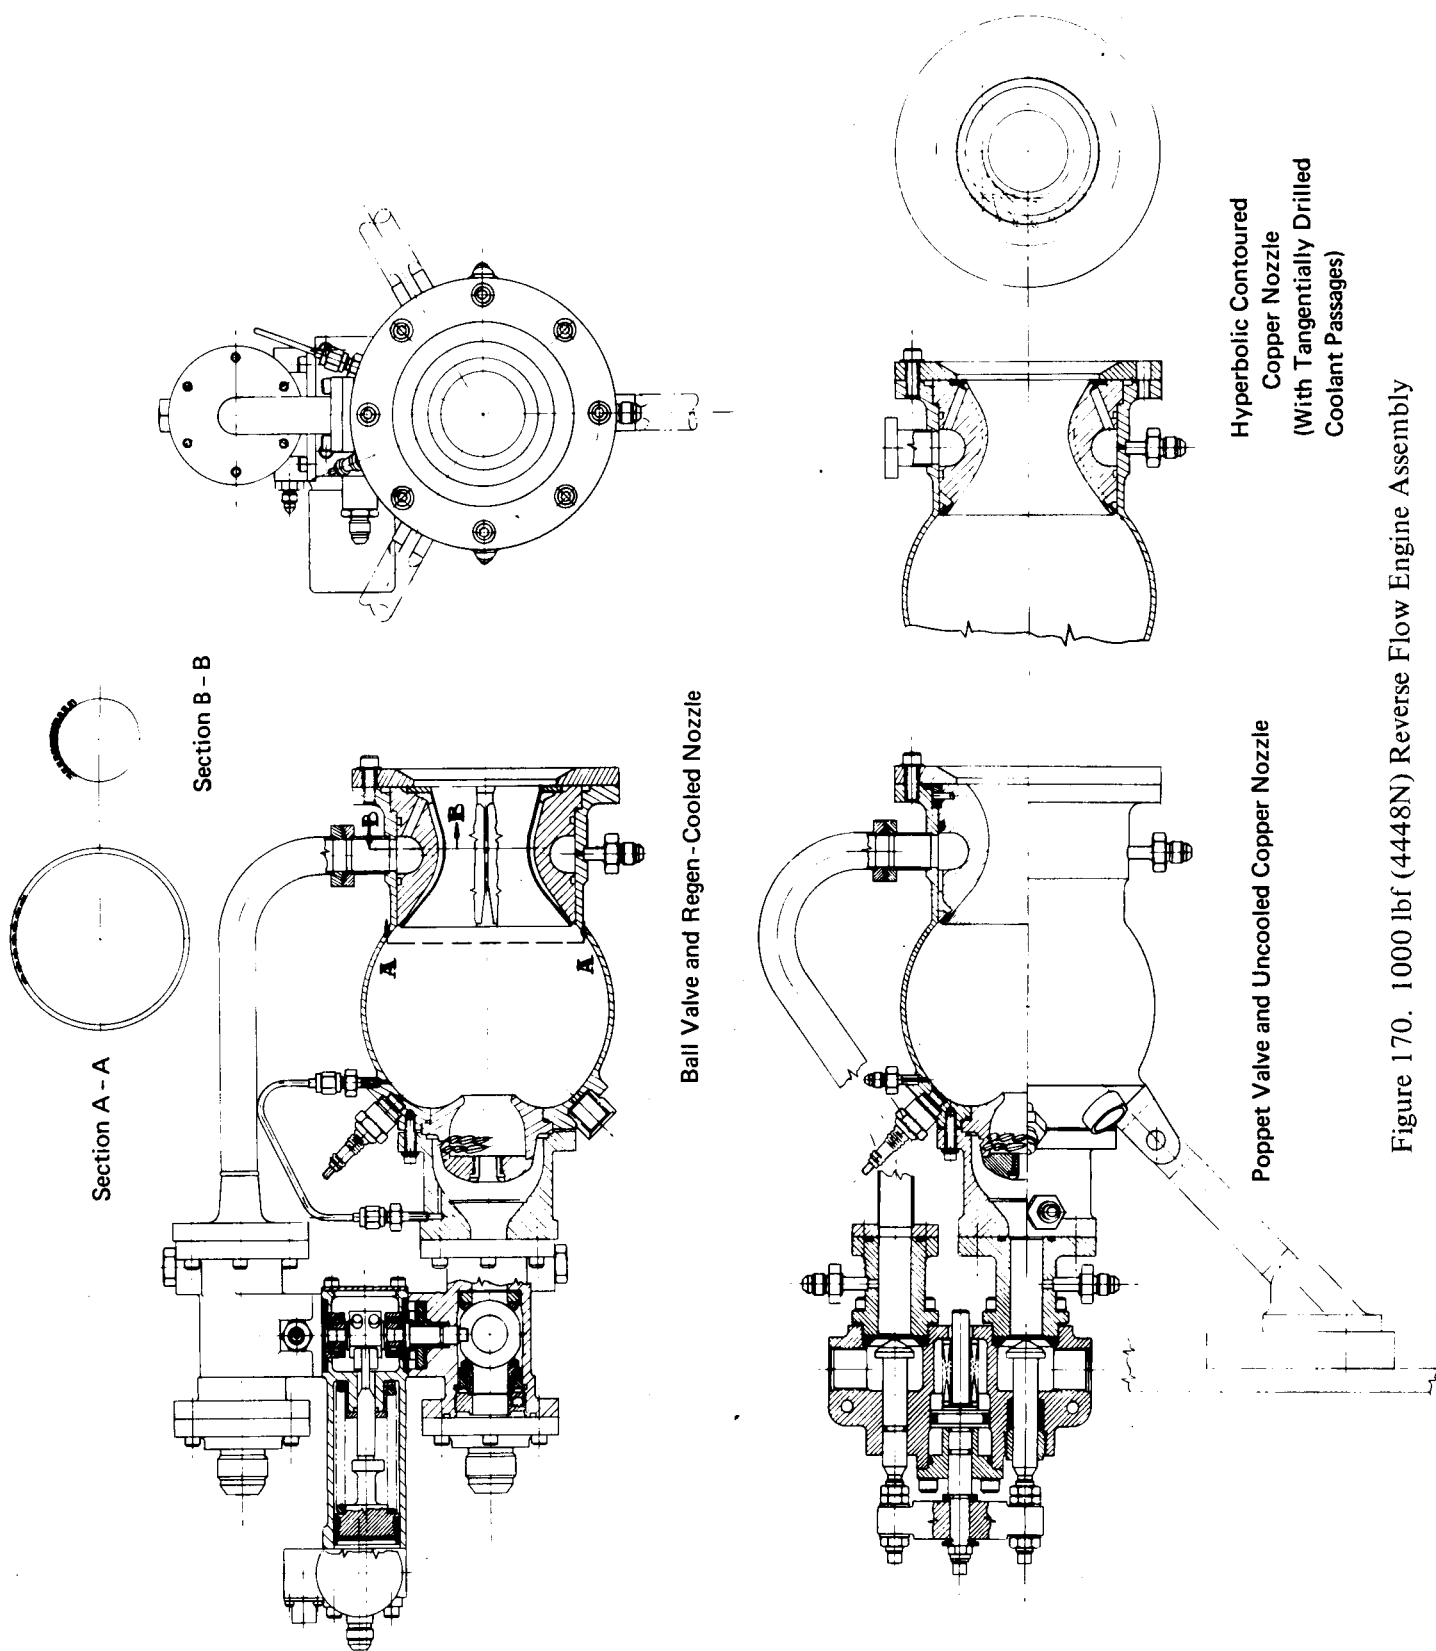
1000 lbf (4448N) Reverse Flow Engine Assembly
